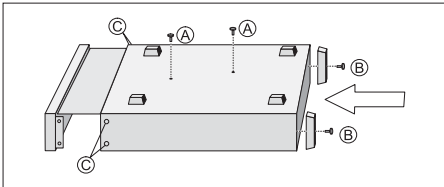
Remove the screws and push the frequency standard out of the cover.
